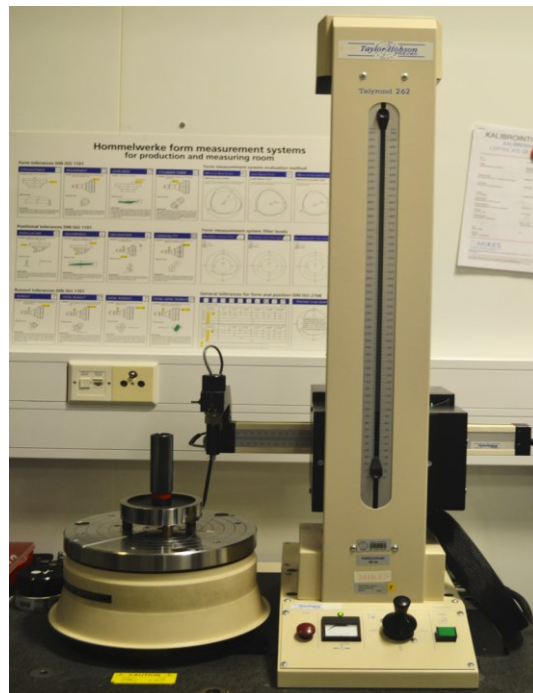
A cylindricity measuring machine measuring a plug gauge.
